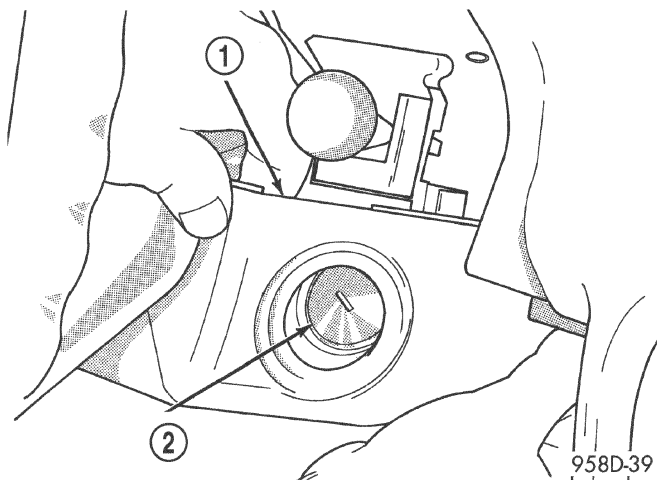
Lower Steering Column Shroud Screw Locations
